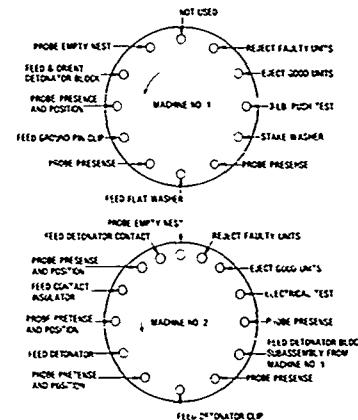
Operations for automatic assembly and test of PN 11722620.
